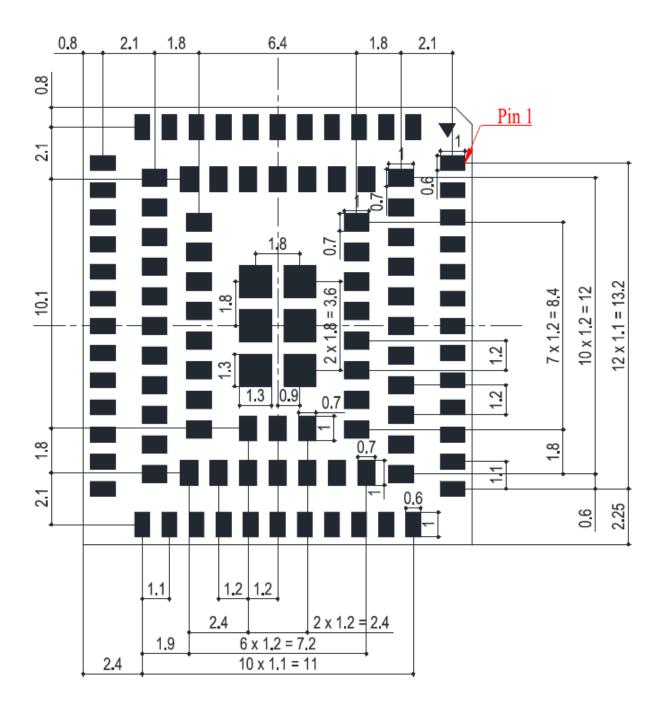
Bottom Dimensions (Bottom View, Unit: mm)
